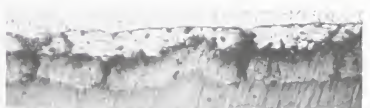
Same sheet as Fig. 11 after right angle bend with  $\frac{1}{4}$  in. radius fillet. Cracking, but no flaking.
